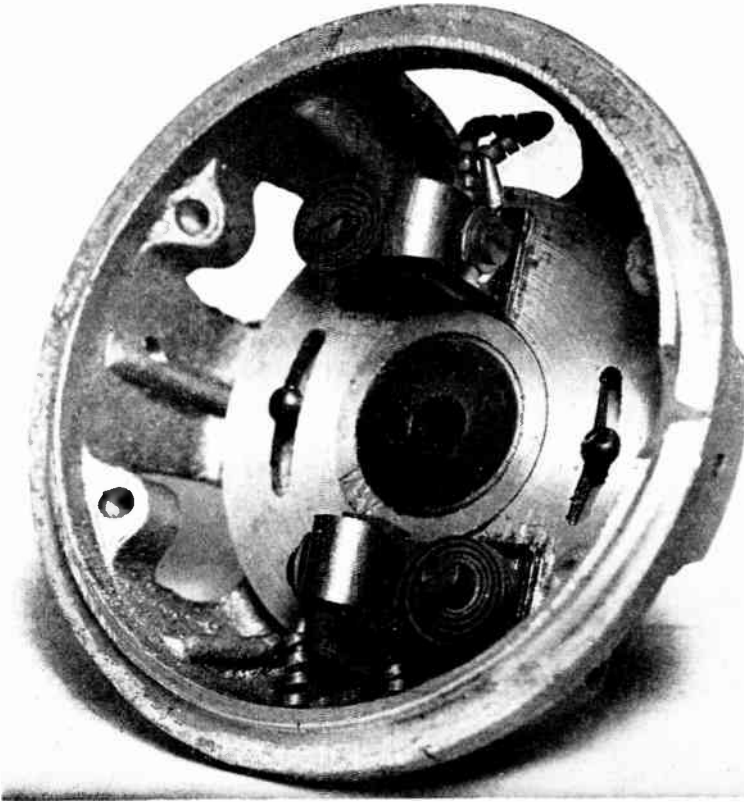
BRUSH GEAR ASSEMBLY OF TWO-POLE DYNAMO.
